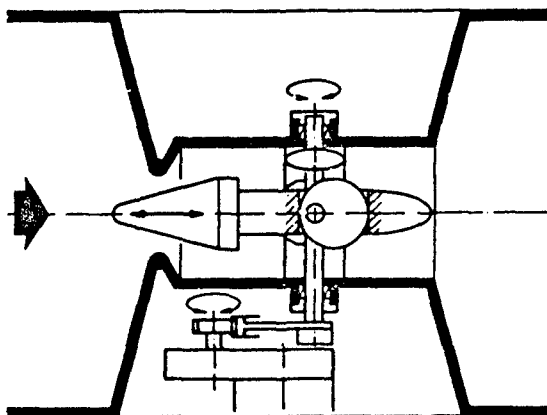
(1) Rotating Blade/Butterfly Valve
